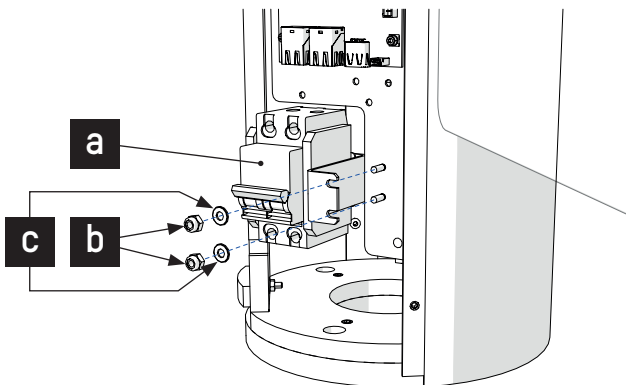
Power supply replacement (Circuit breaker assembly)
